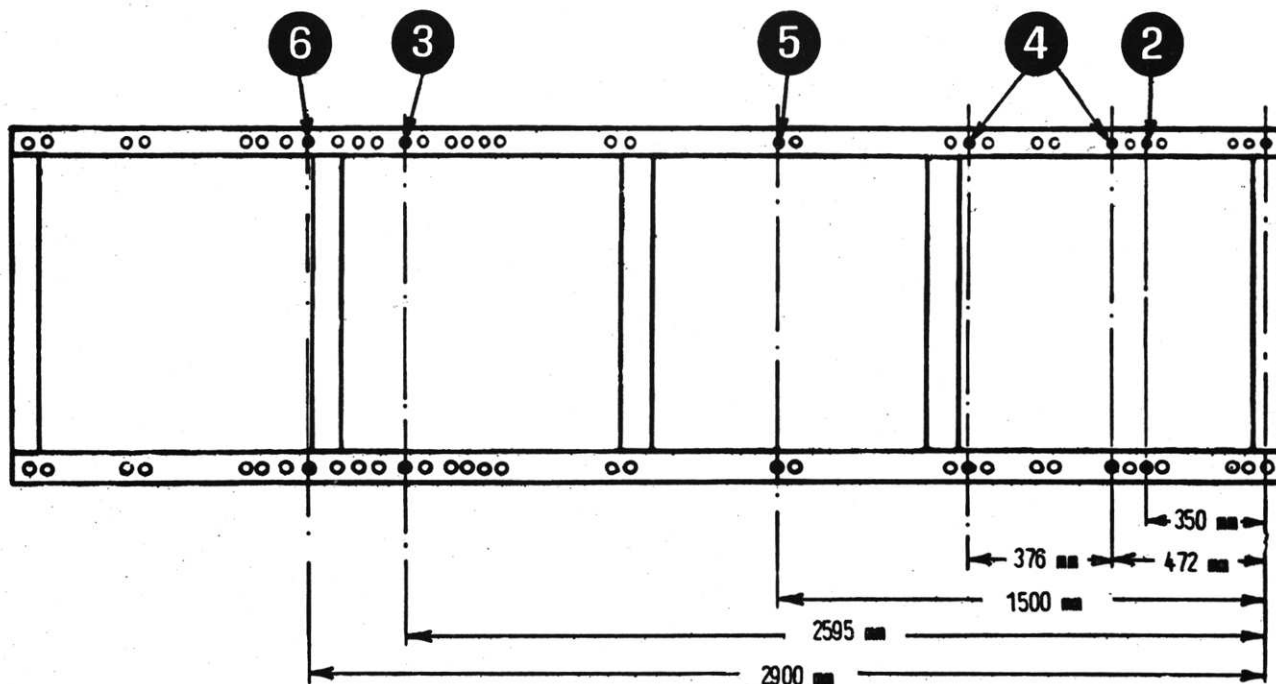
PLAN OF DETAIL ① WITH LOCATION OF THE HOLES TO BE EMPLOYED
